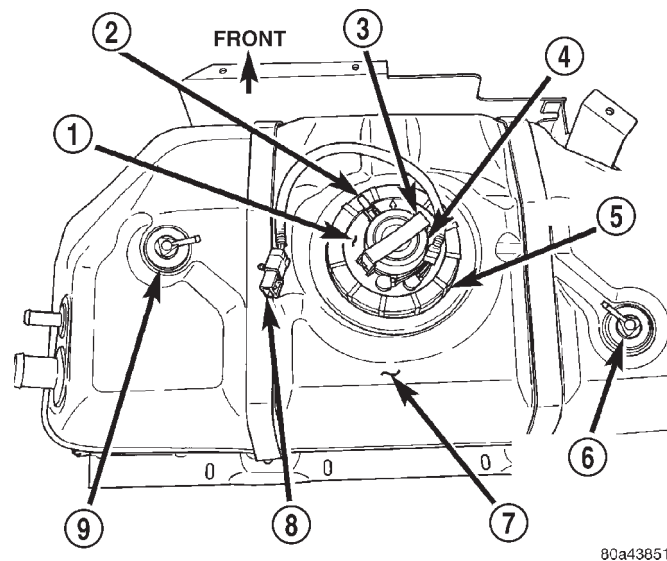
Fuel Tank/Fuel Pump Module (Top View)
